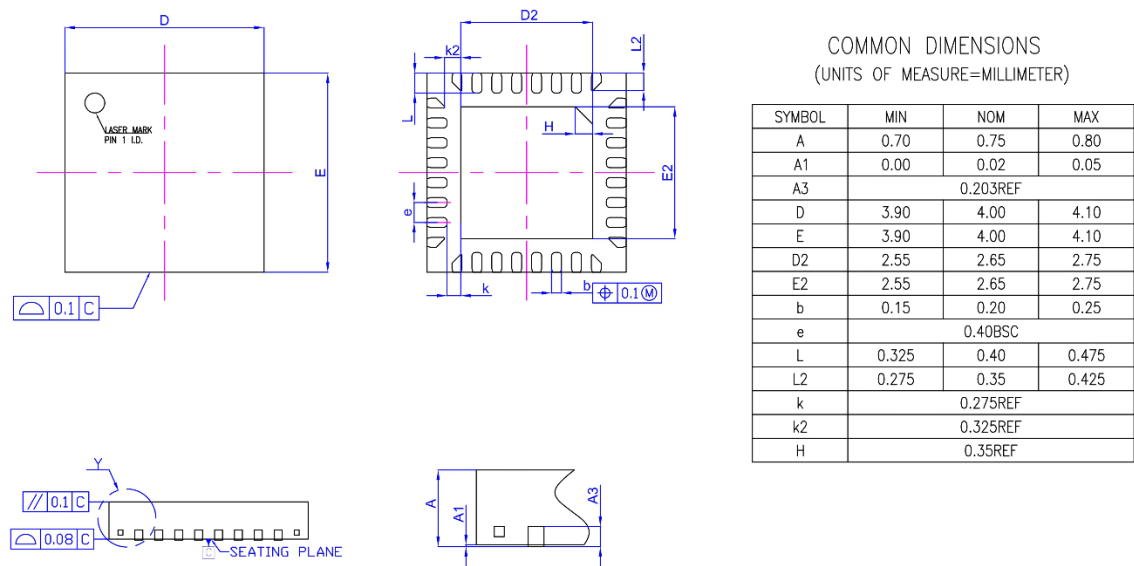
QFN32 (4 \* 4 mm) Package Outline Drawing
